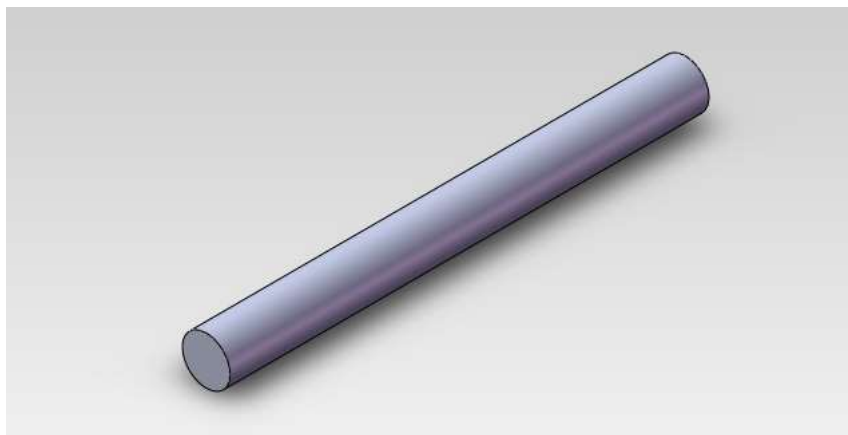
CAD rendition of the piston pin (original was destroyed during disassembly)
